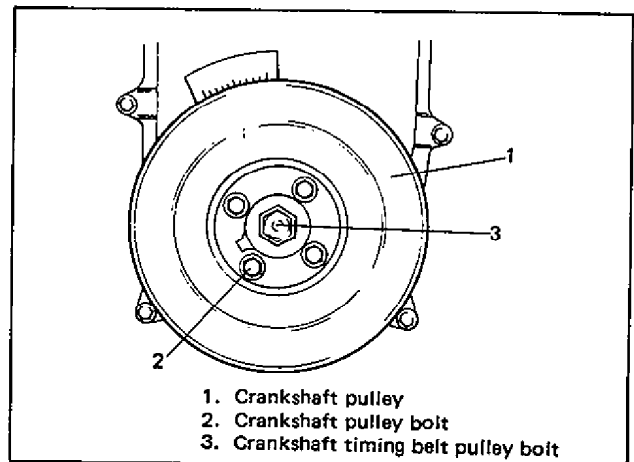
A-28 Crankshaft Pulley and Pulley Bolts
